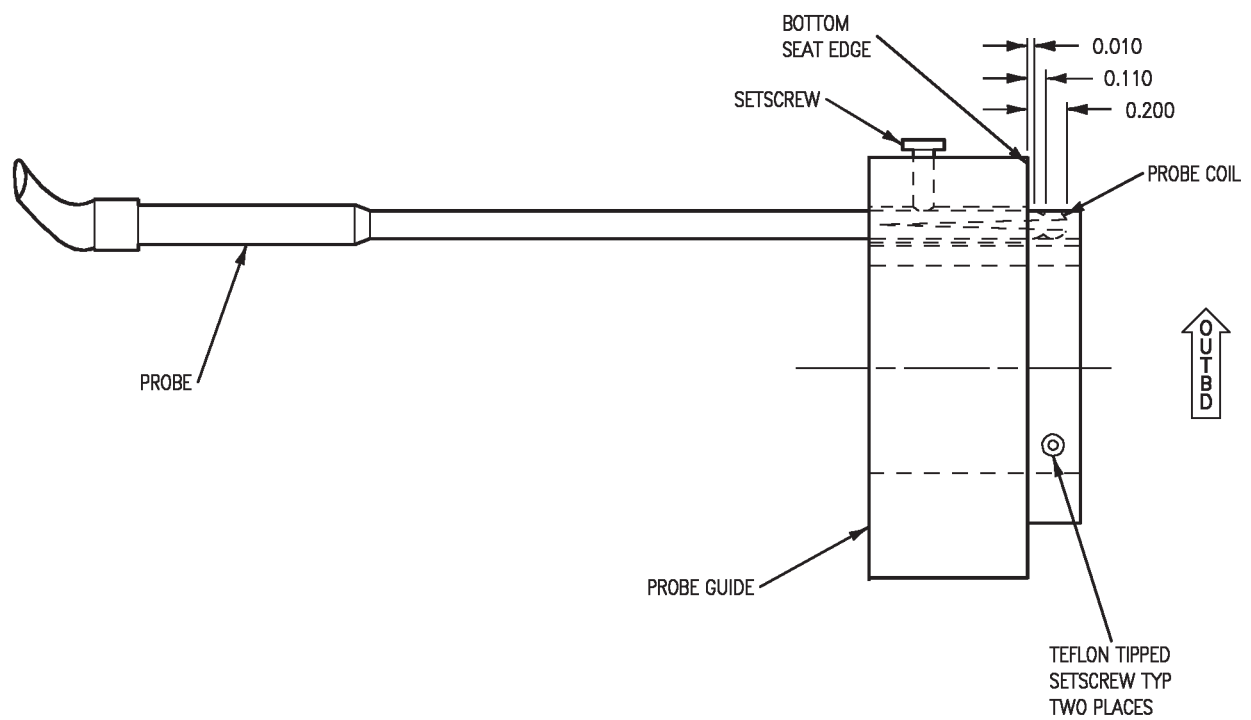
Probe Collar/Coil Position for Fastener Hole Inspection
